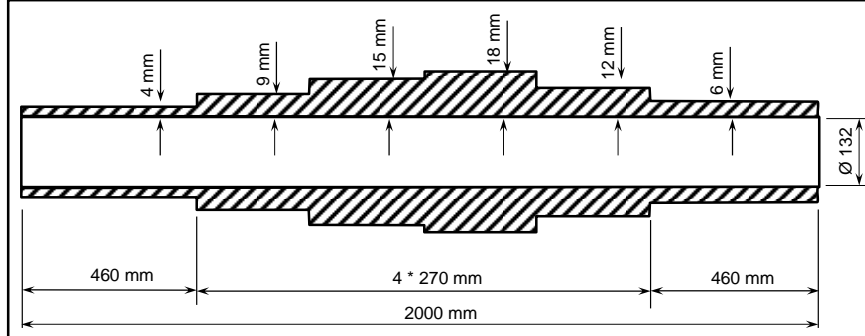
Dimensions of 'stepped' pipe spool piece for clamp-on heads
